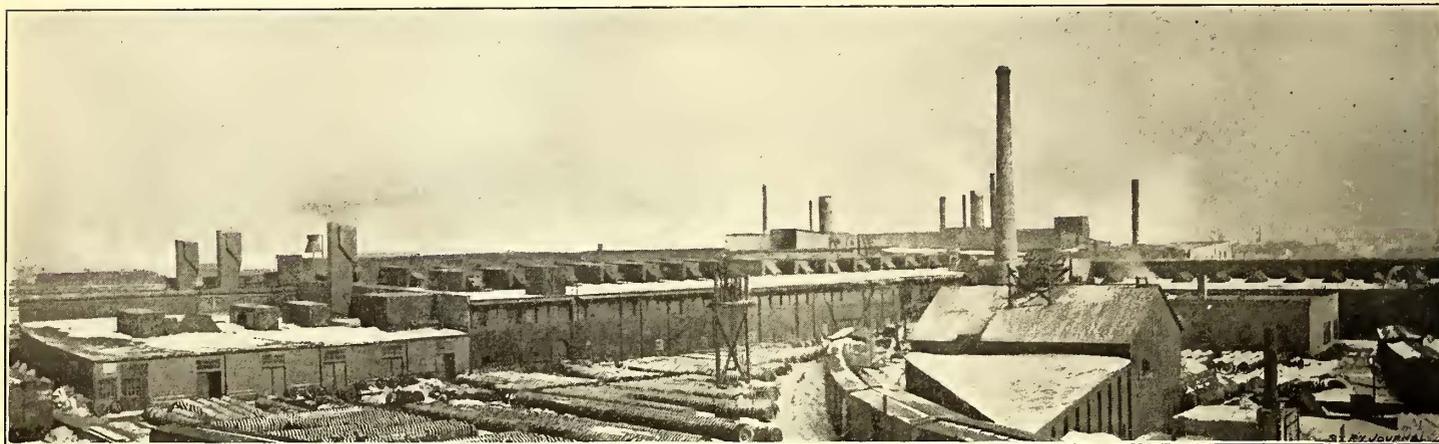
VIEW OF CAR WHEEL WORKS.
